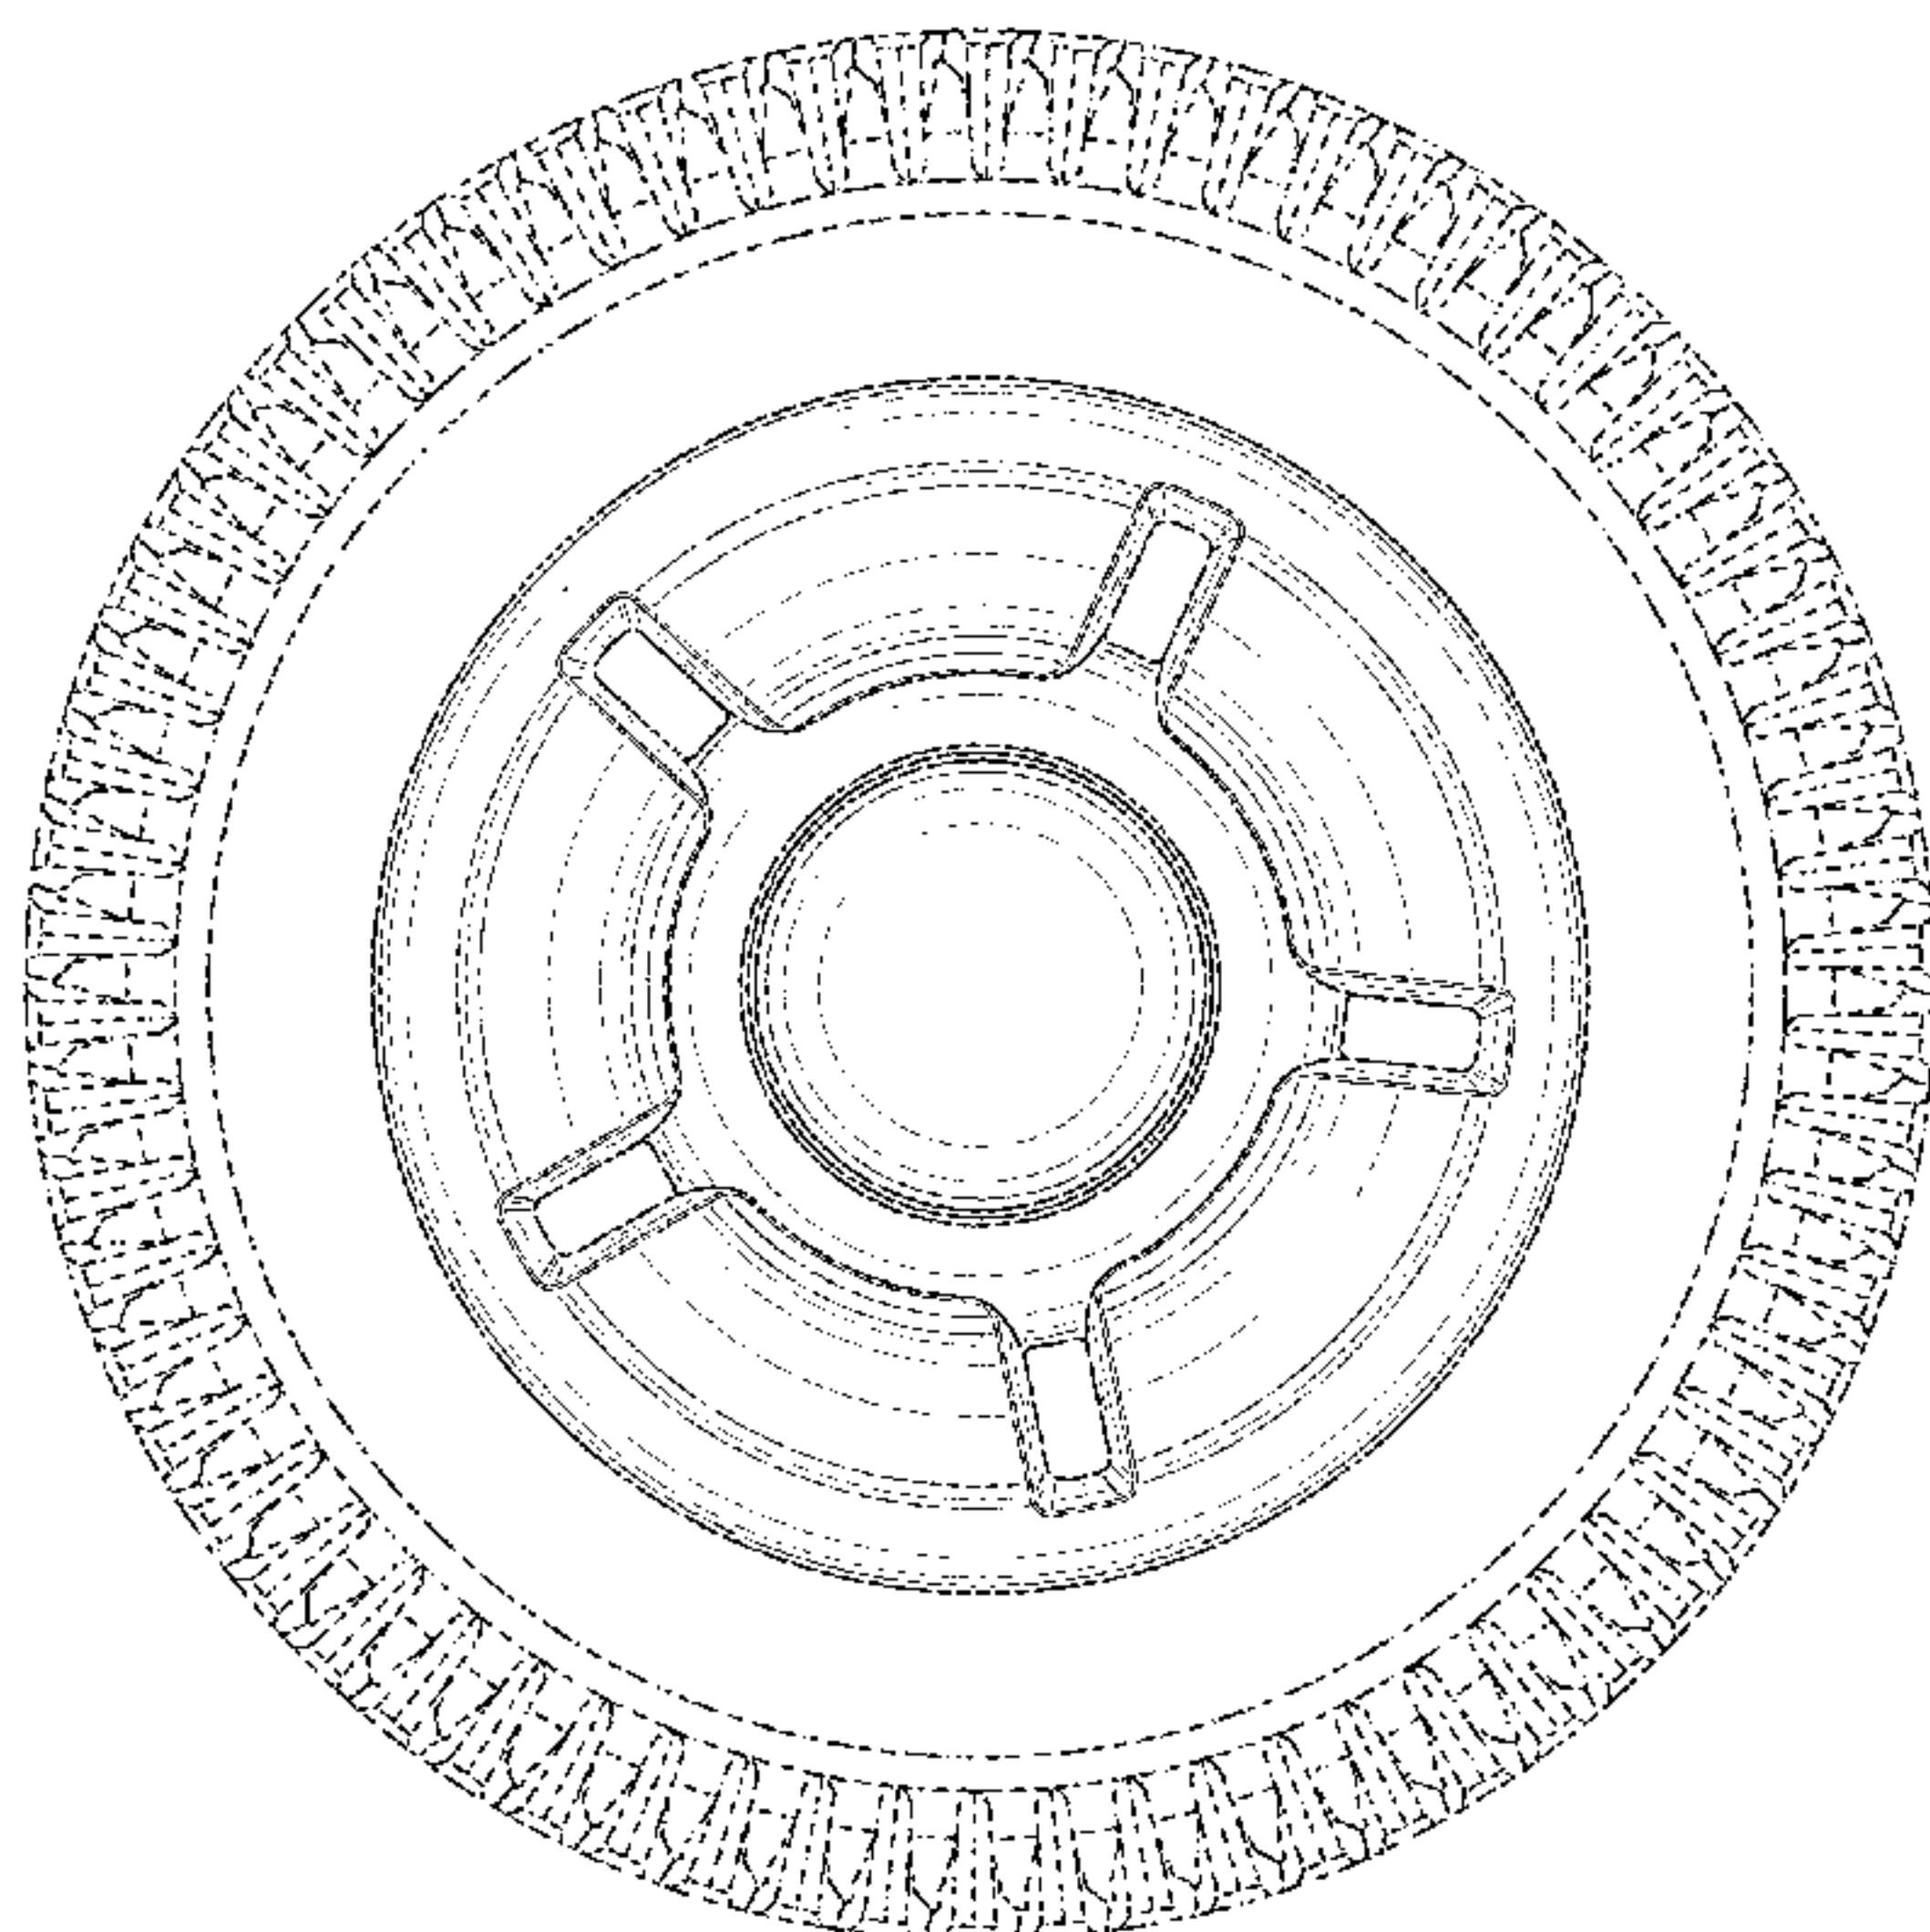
is a front view of the wheel hub cap of FIG. 6 with
